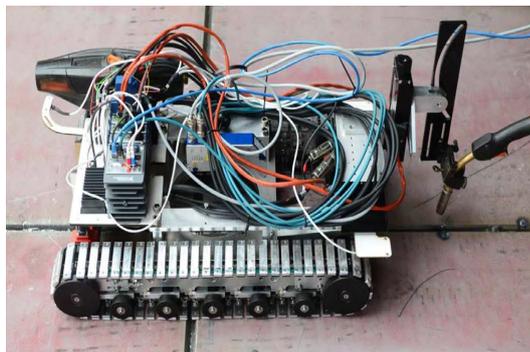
Magnetic climbing robot with autonomous welding
